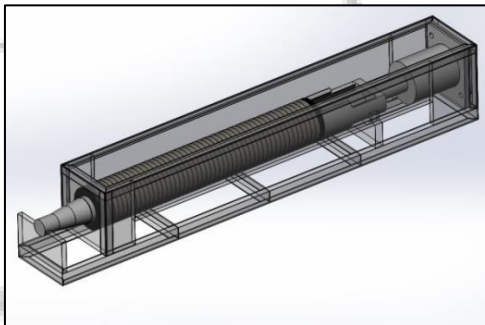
Isometric view (Visible) of CAD model of Fiber disc press machine
